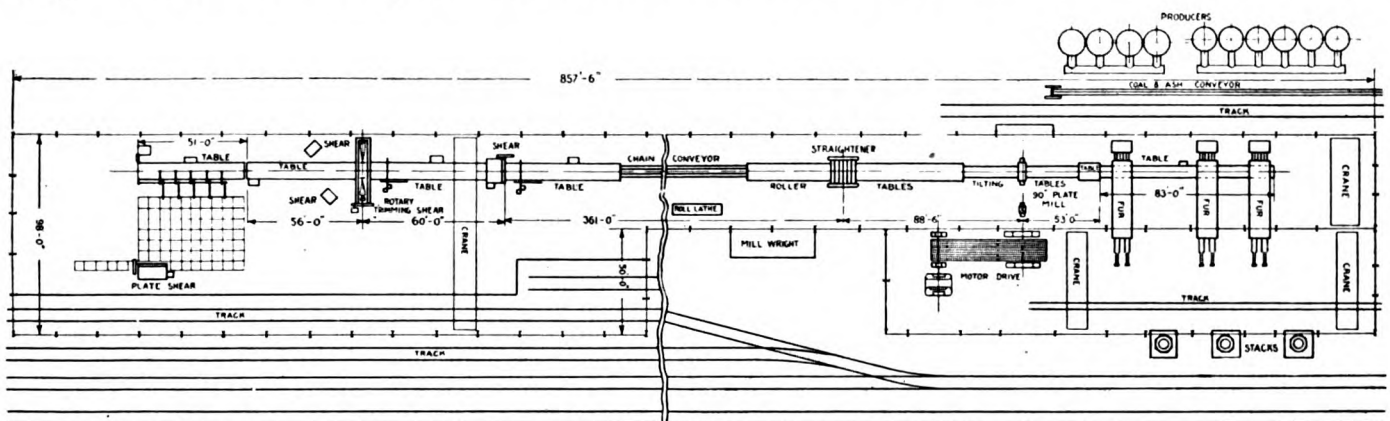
32" x 190" plate mill—Inland Steel Company—This mill was laid out for rolling car and tank plate—For ship plate and other heavy varieties, the cooling space provided by the chain conveyor is not quite sufficient, and for boiler plate or other kinds where inspection is rigid, the shearing capacity and storage rooms are too limited.
